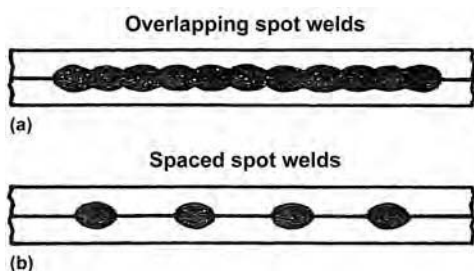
Types of lap joints. (a) Pressure-tight joint. (b) Nonpressure-tight joint
